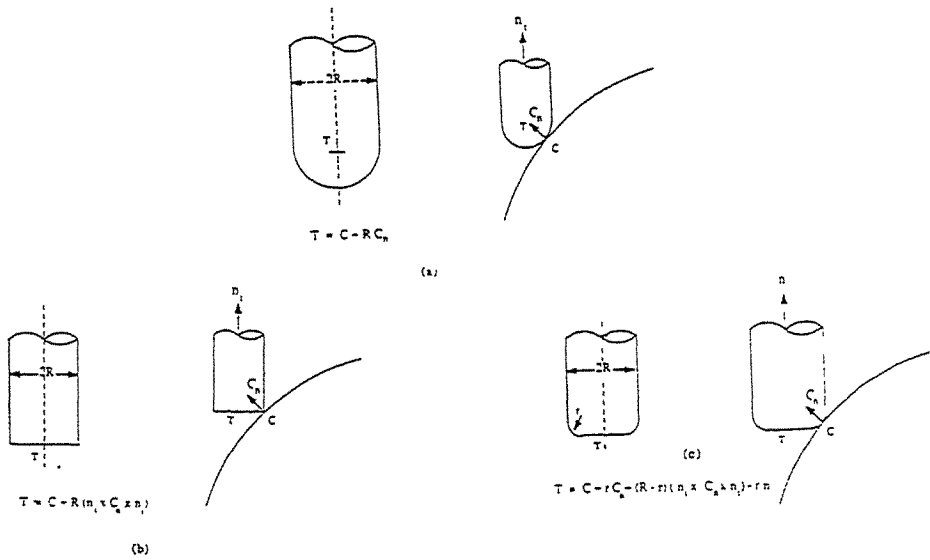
Cutter Contact (CC) point vs Cutter Location (CL) point for (a) Ball (b) flat and (c) end radius milling tools
